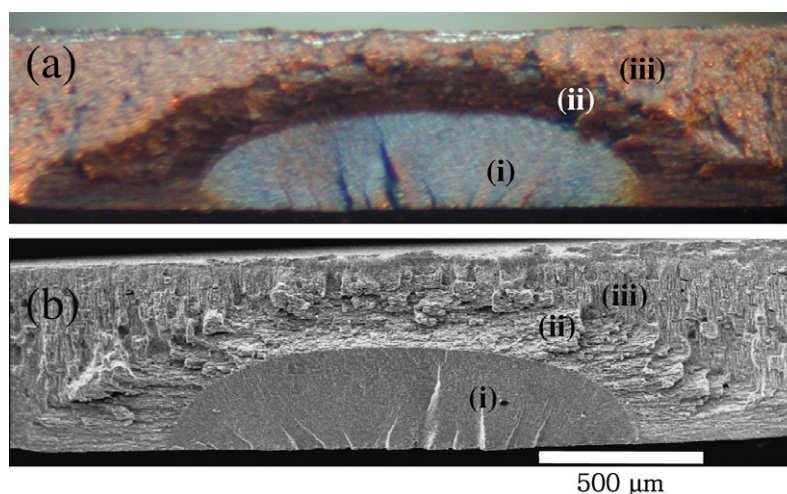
Typical fracture surfaces showing (i) fatigued pre-crack, (ii) ISCC crack and (iii) ductile fracture: (a) optical microscope image and (b) SEM image.
